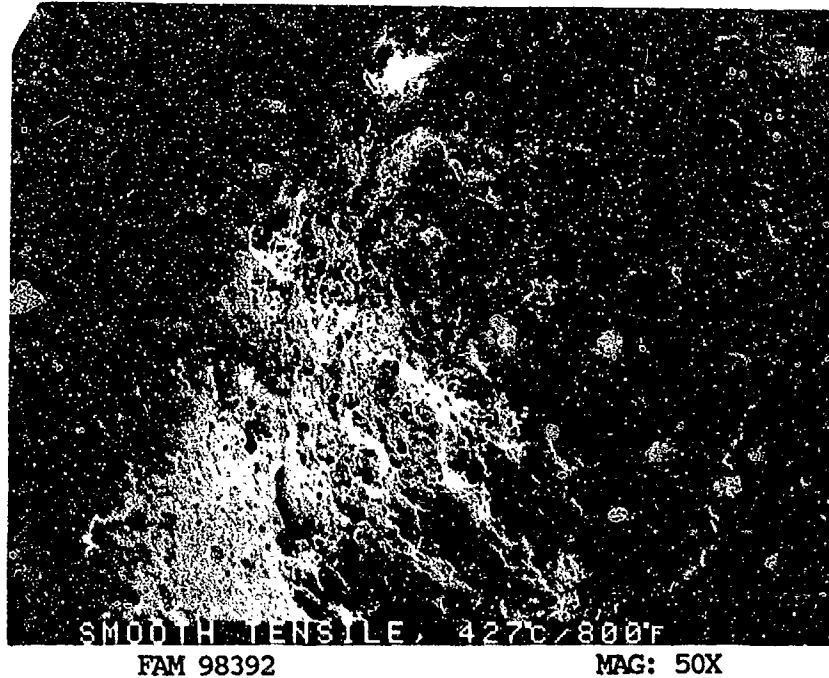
Low magnification view showing relatively small primary fracture area at the center of the fracture surface, with large area of final overstress (shear lip). The extent of the shear lip is shown by a bracket.
